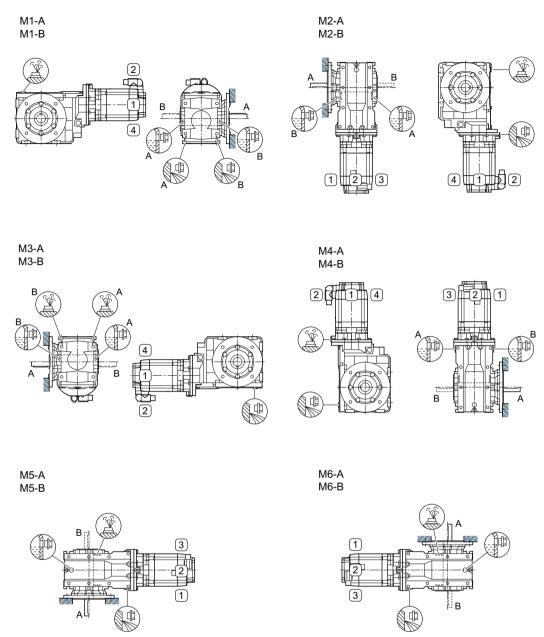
Mounting positions for servo bevel geared motor B.F (flange-mounted design) or B.Z (housing flange design), frame sizes 39 - 49, 2 stage
